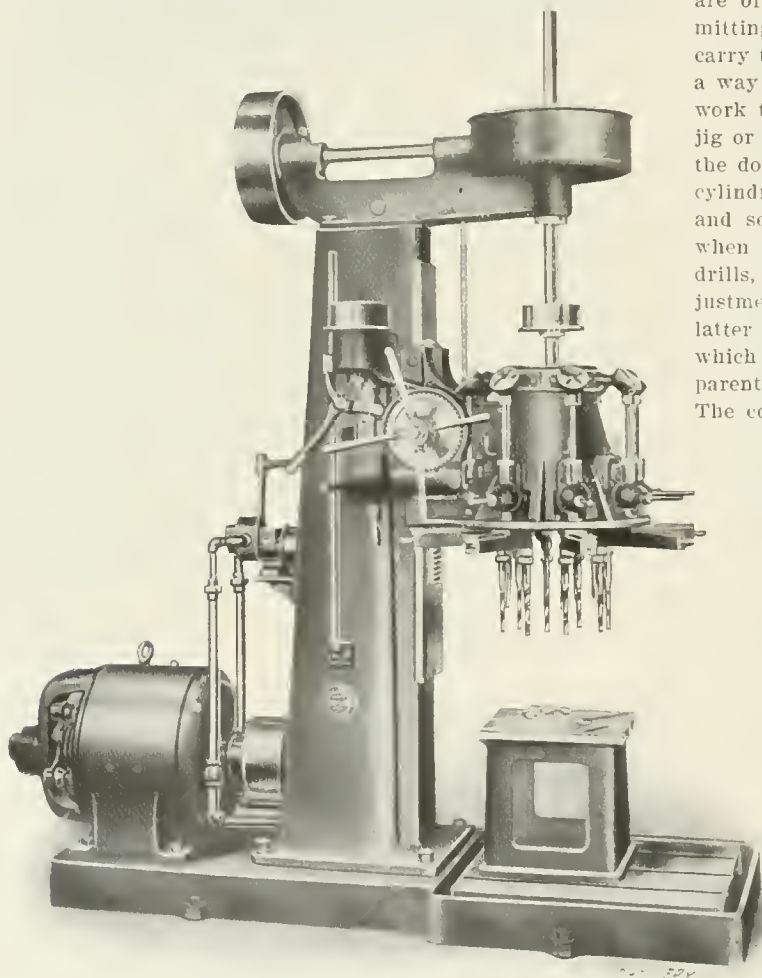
Multi-spindle Drilling Machine, the Spindles of which are driven by Bevel Gears
